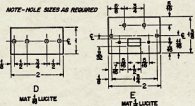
Box, shield and mounting bracket layouts and drilling dimensions.
